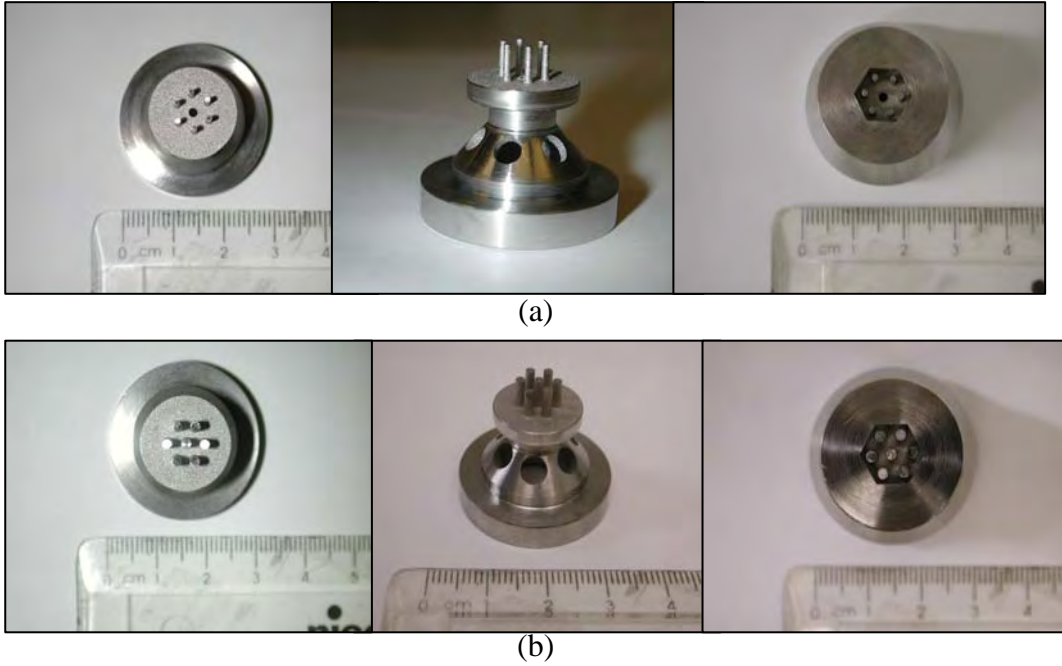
(a) 6-hole die set (b) 7-hole die set for SEST preform extrusion
